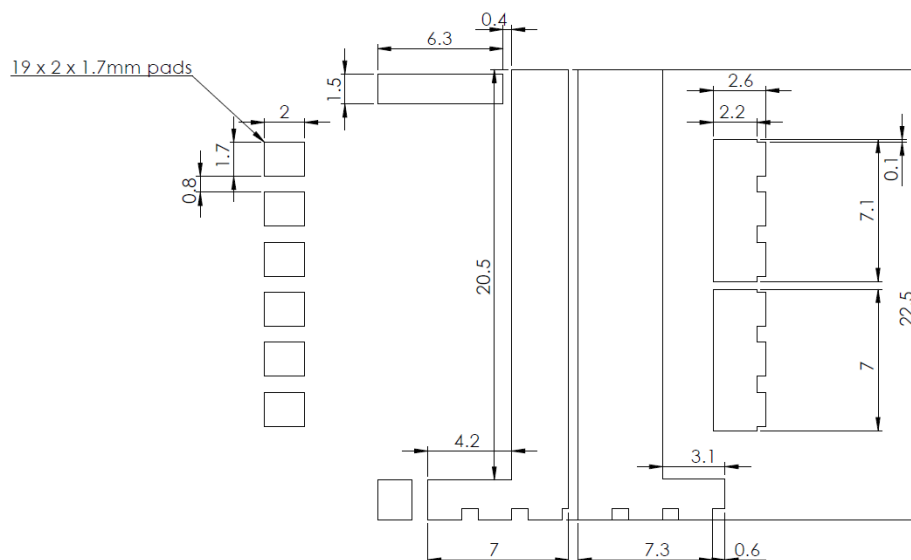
Suggested PCB footprint. All noted dimensions in mm. Not to scale.
